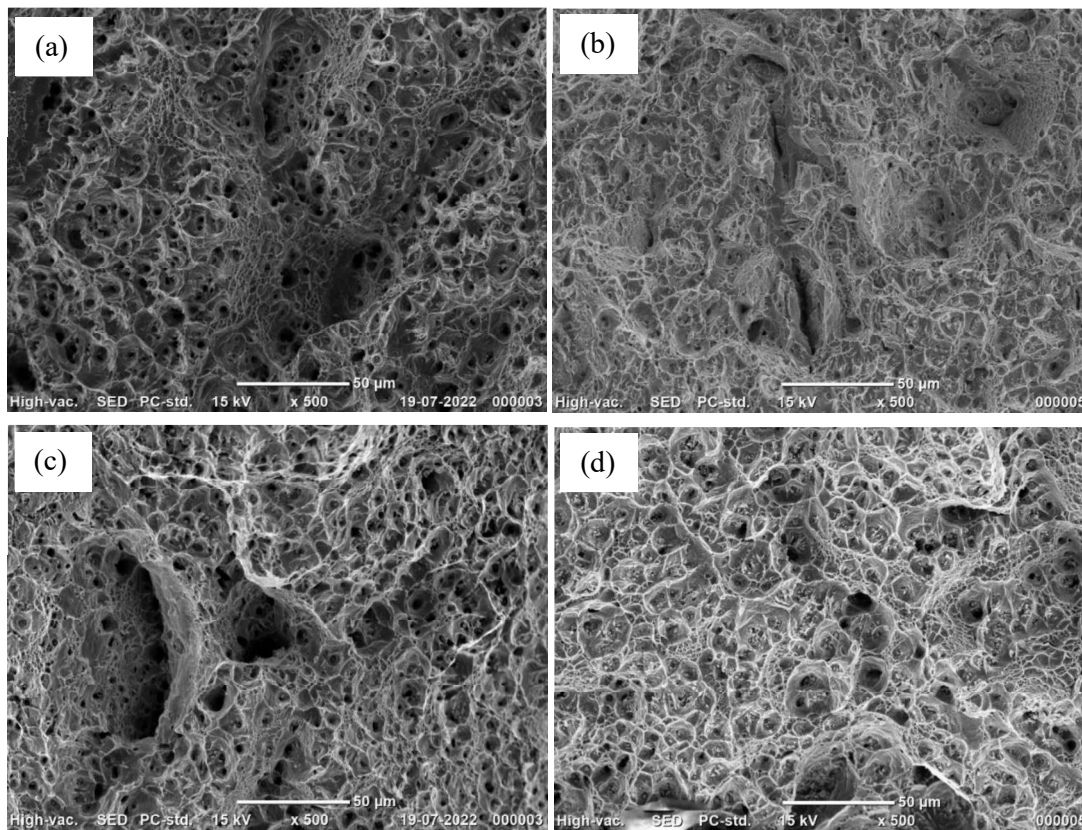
Fracture morphology of (a) MAF-0, (b) MAF-5 of SS1 steel and (c) MAF-0, (d) MAF-2 of SS2 steel.
